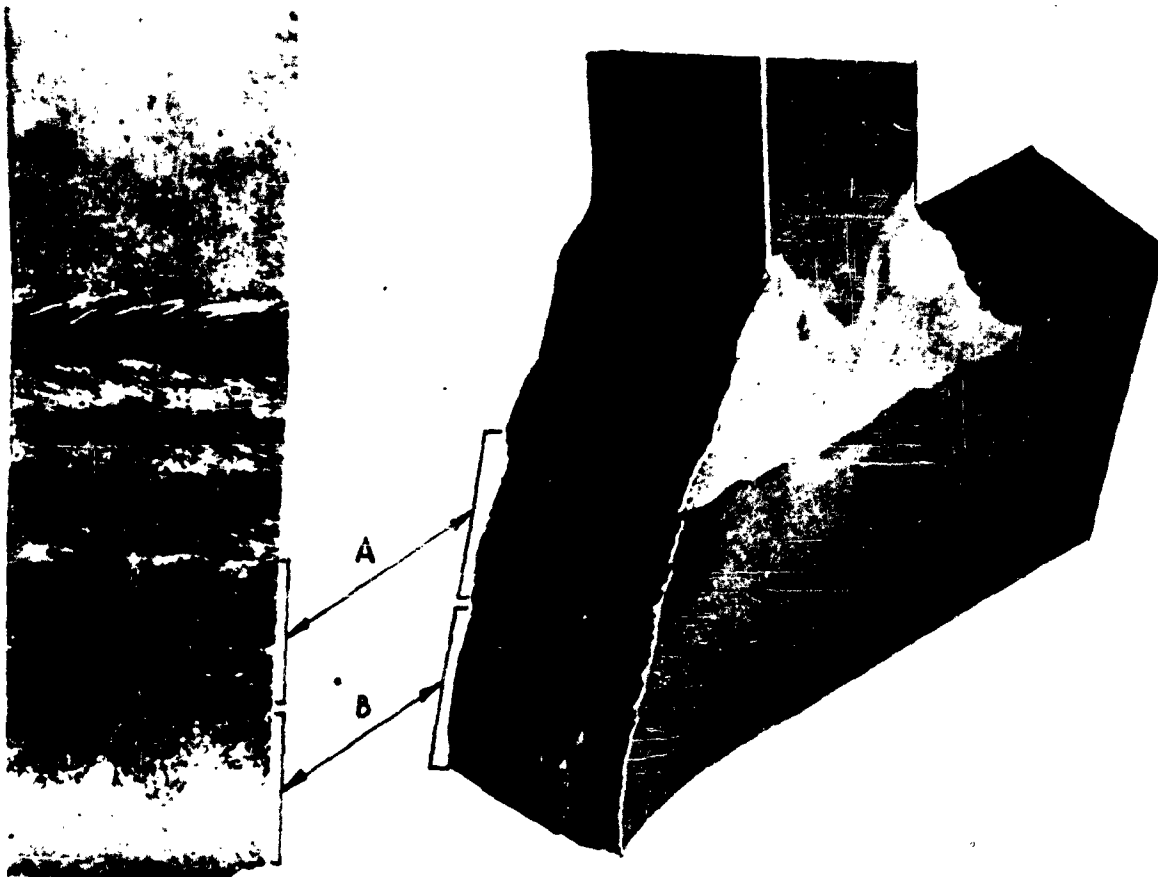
Typical fracture of HY-80 test specimens showing tensile rupture (A) and shear rupture (B) in failure process.
